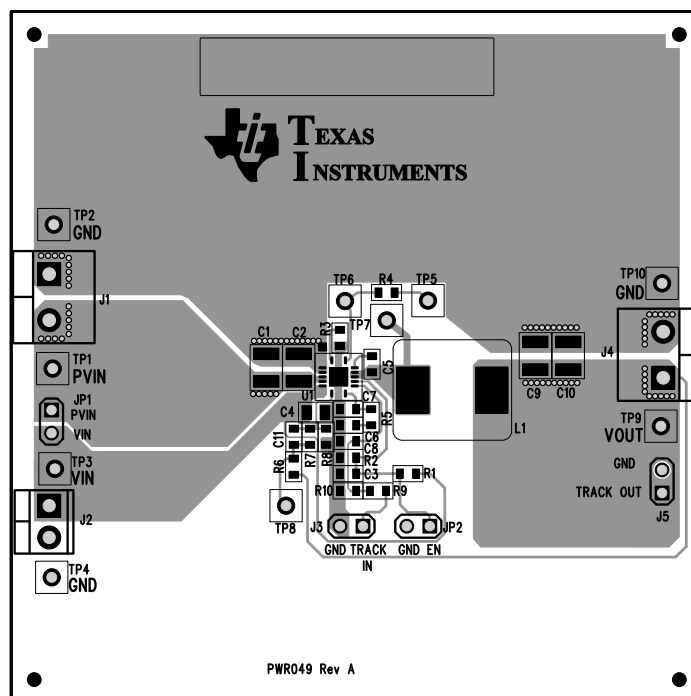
TPS54821EVM-049 Top-Side Assembly
